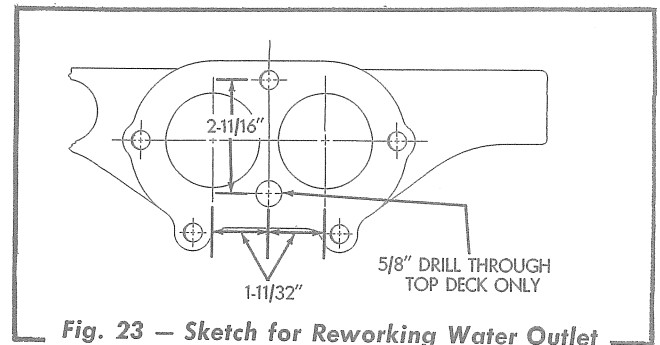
Sketch for Reworking Water Outlet Manifold (Engines Prior to Serial No. 2753)
